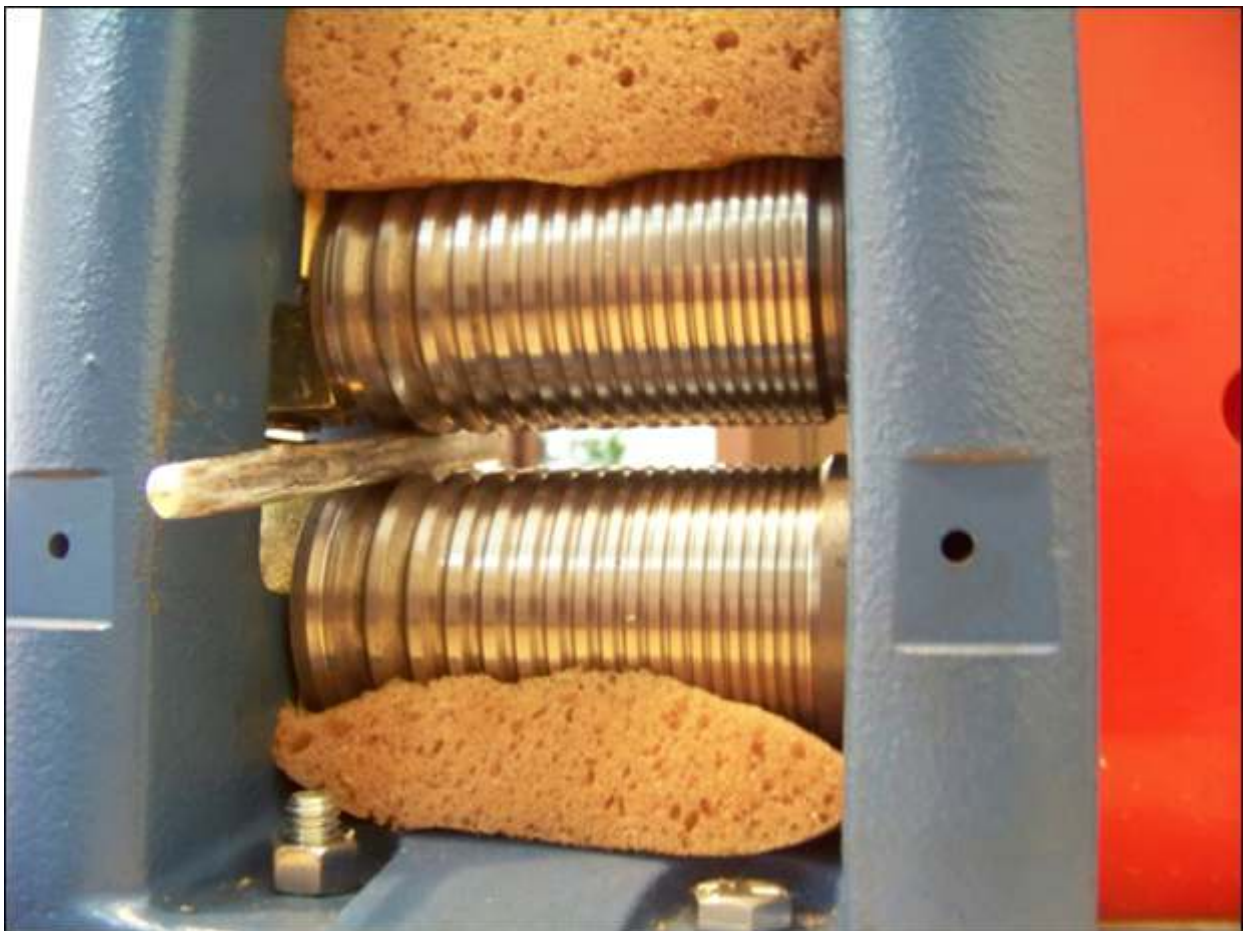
Wire Drawing – Putting Rod in Rolling Mill
